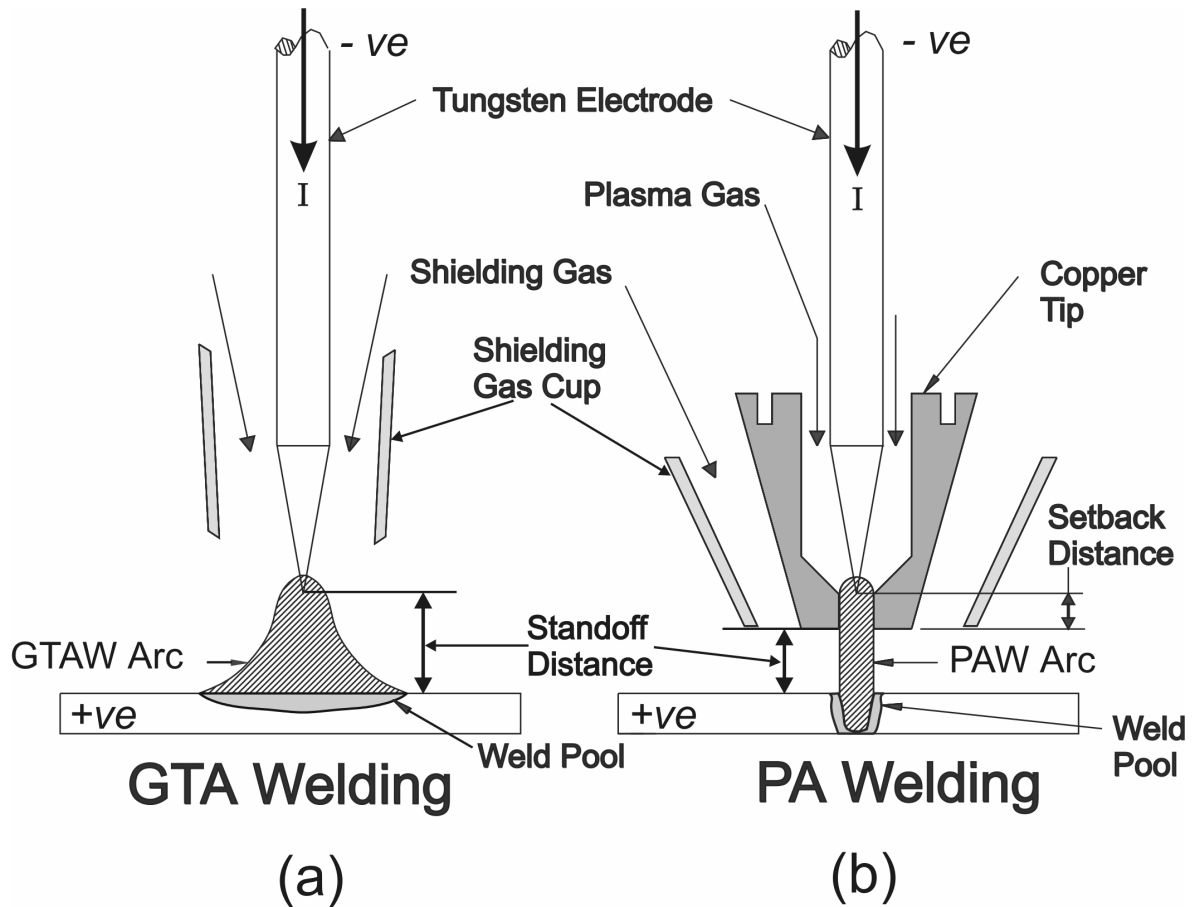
Comparison of GTA and PAW welding torches showing arc and weld pool profiles: a) GTA welding and b) PAW welding (taken from Deutsch [14]).
